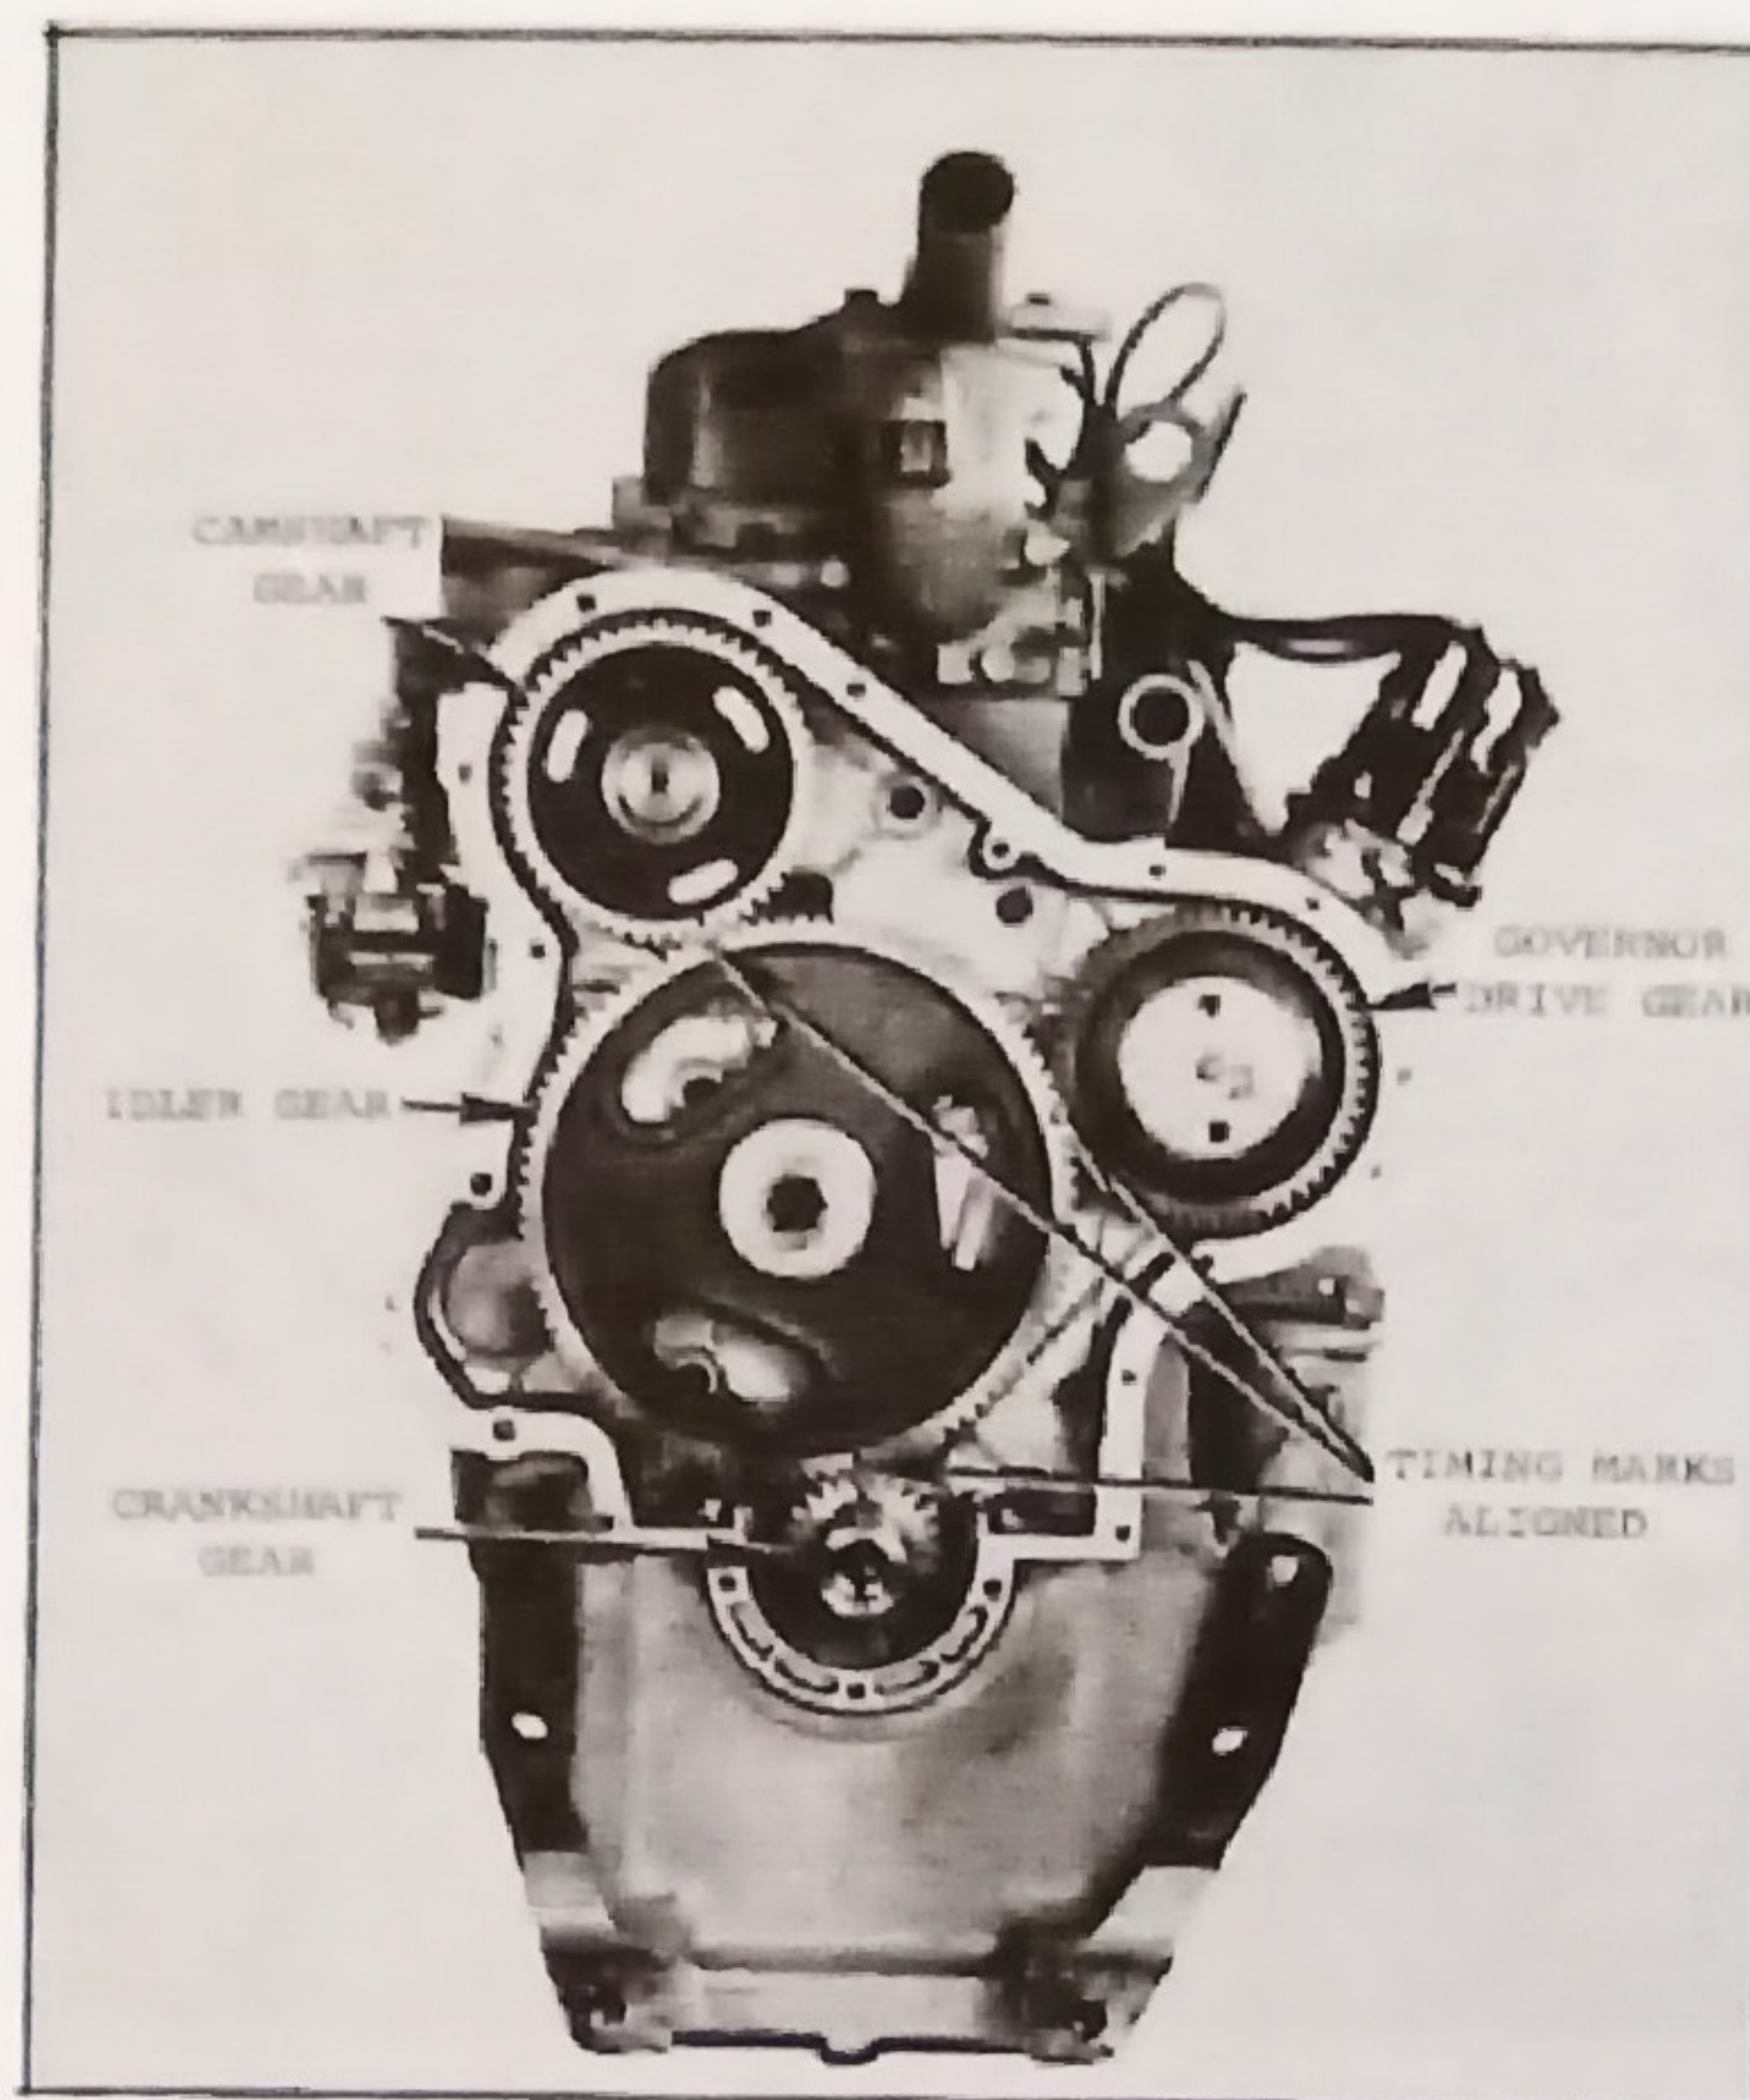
View of Timing Gear Showing Timing Marks Aligned
